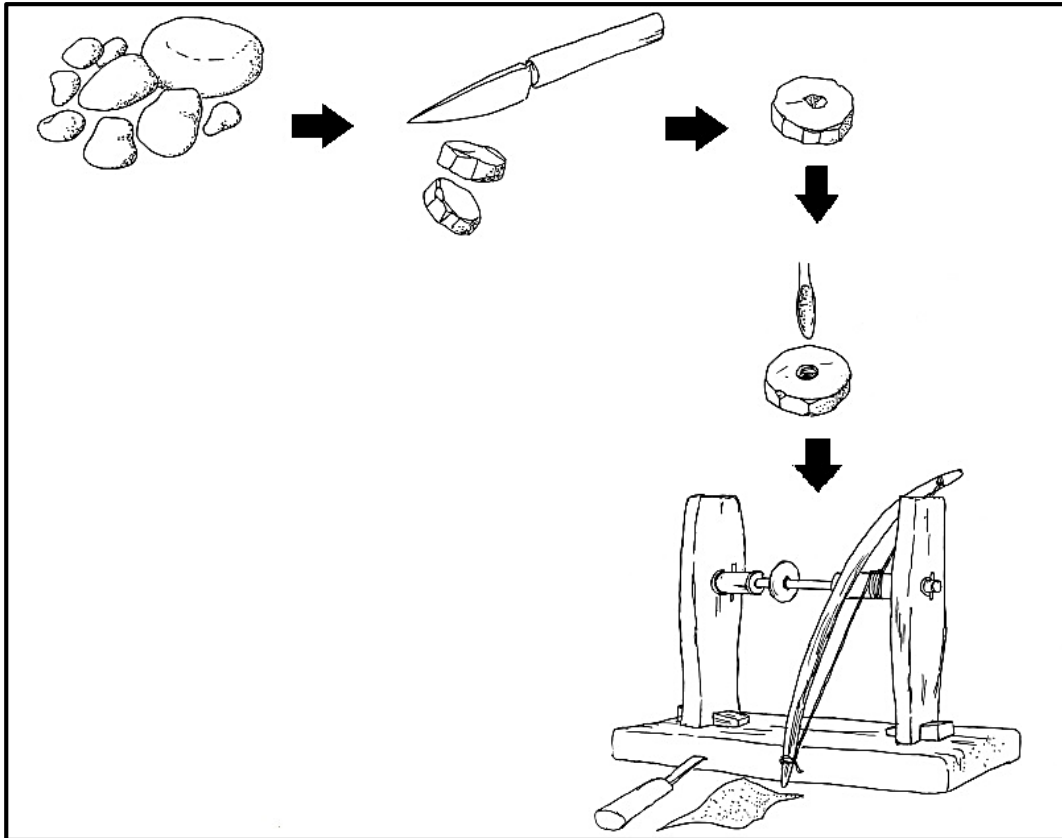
The steps for the manufacture of an amber bead; the raw material, cutting to shape, perforating, and smoothing. Image modified from Callmer (2003b: 346).
